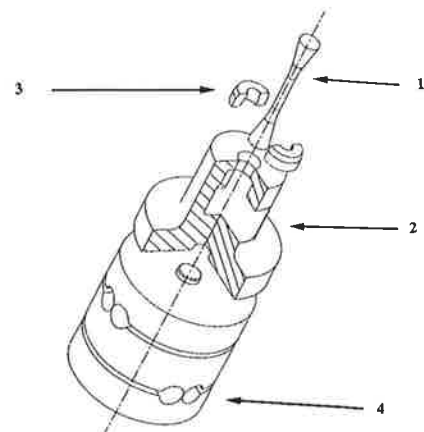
Gripping system for tensile tests: (1) specimen, (2) grip, (3) half-shells, (4) elastic joint.
